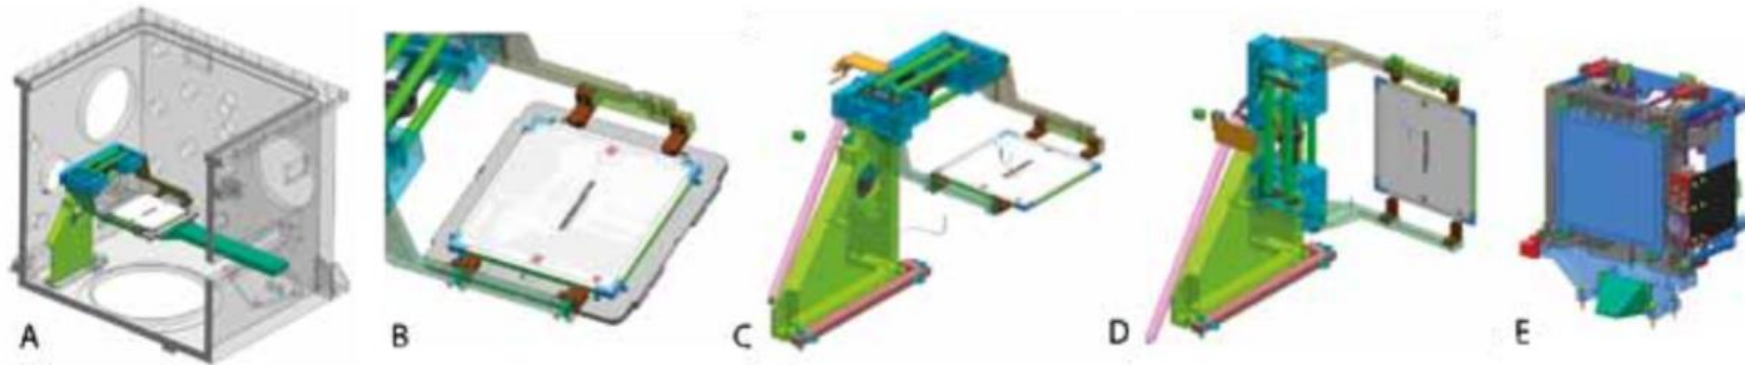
(a) Vacuum handler robot in exposure chamber; (b) Take-over reticle from inner base plate; (c) Vacuum handler robot retracted; (d) SGF has flipped the reticle vertically; (e) Reticle is mounted to sample chuck.
